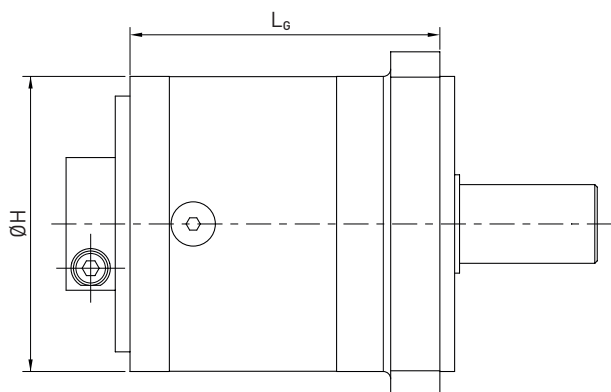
Dimensional drawing of gearbox for linear modules HM-B, linear tables HT-B, cantilever axes HC and double axes HD
